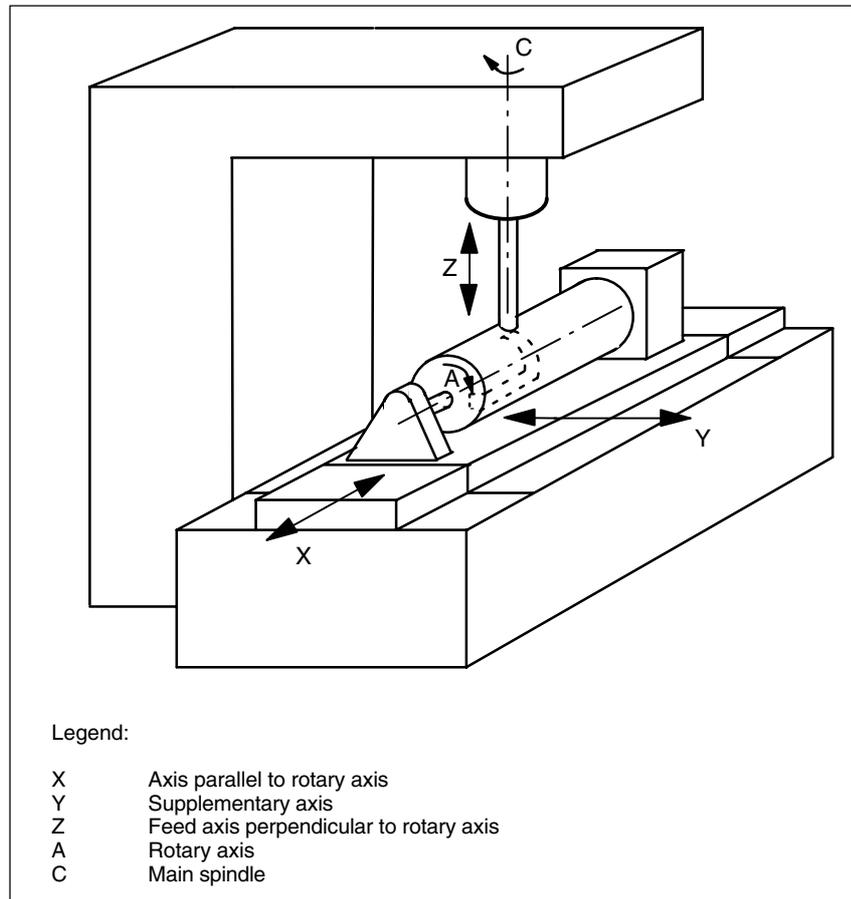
Machining grooves on a cylinder surface with X-C-Z kinematics
